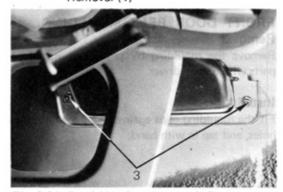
Roof Side Bent Louver & Duct Removal (2)
